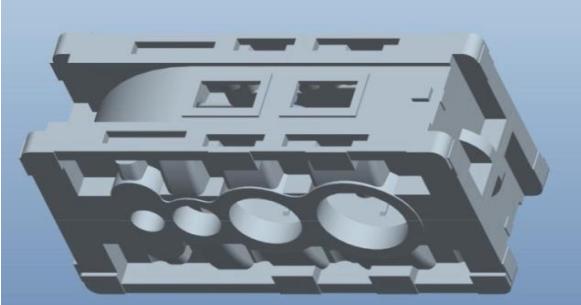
3-Dimesional assembly modelling of gear case in Pro-E [3]
